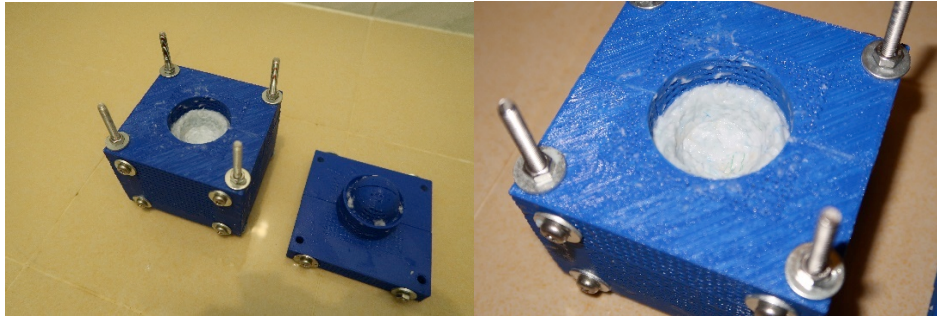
Pulp is poured into the cavity formed by the middle and bottom moulds, and compressed with the top mould (left). Close-up view of the pulp in mould after compressing (right).
